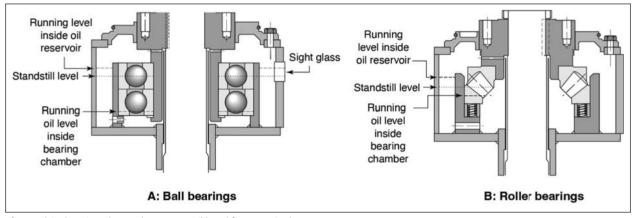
This drawing shows the proper oil level for a vertical motor.
